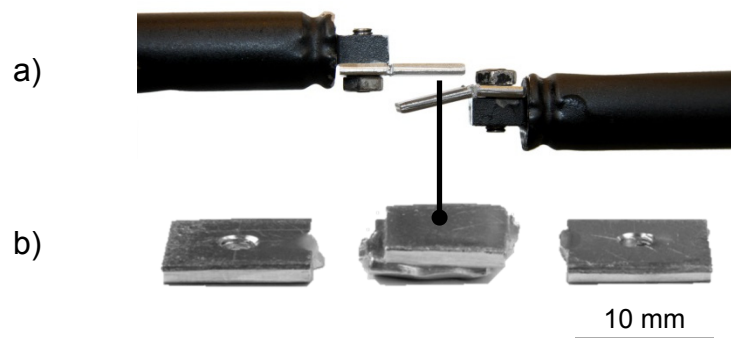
Adjustment of the impact angle by bending one specimen (a) and welded sample (b)
